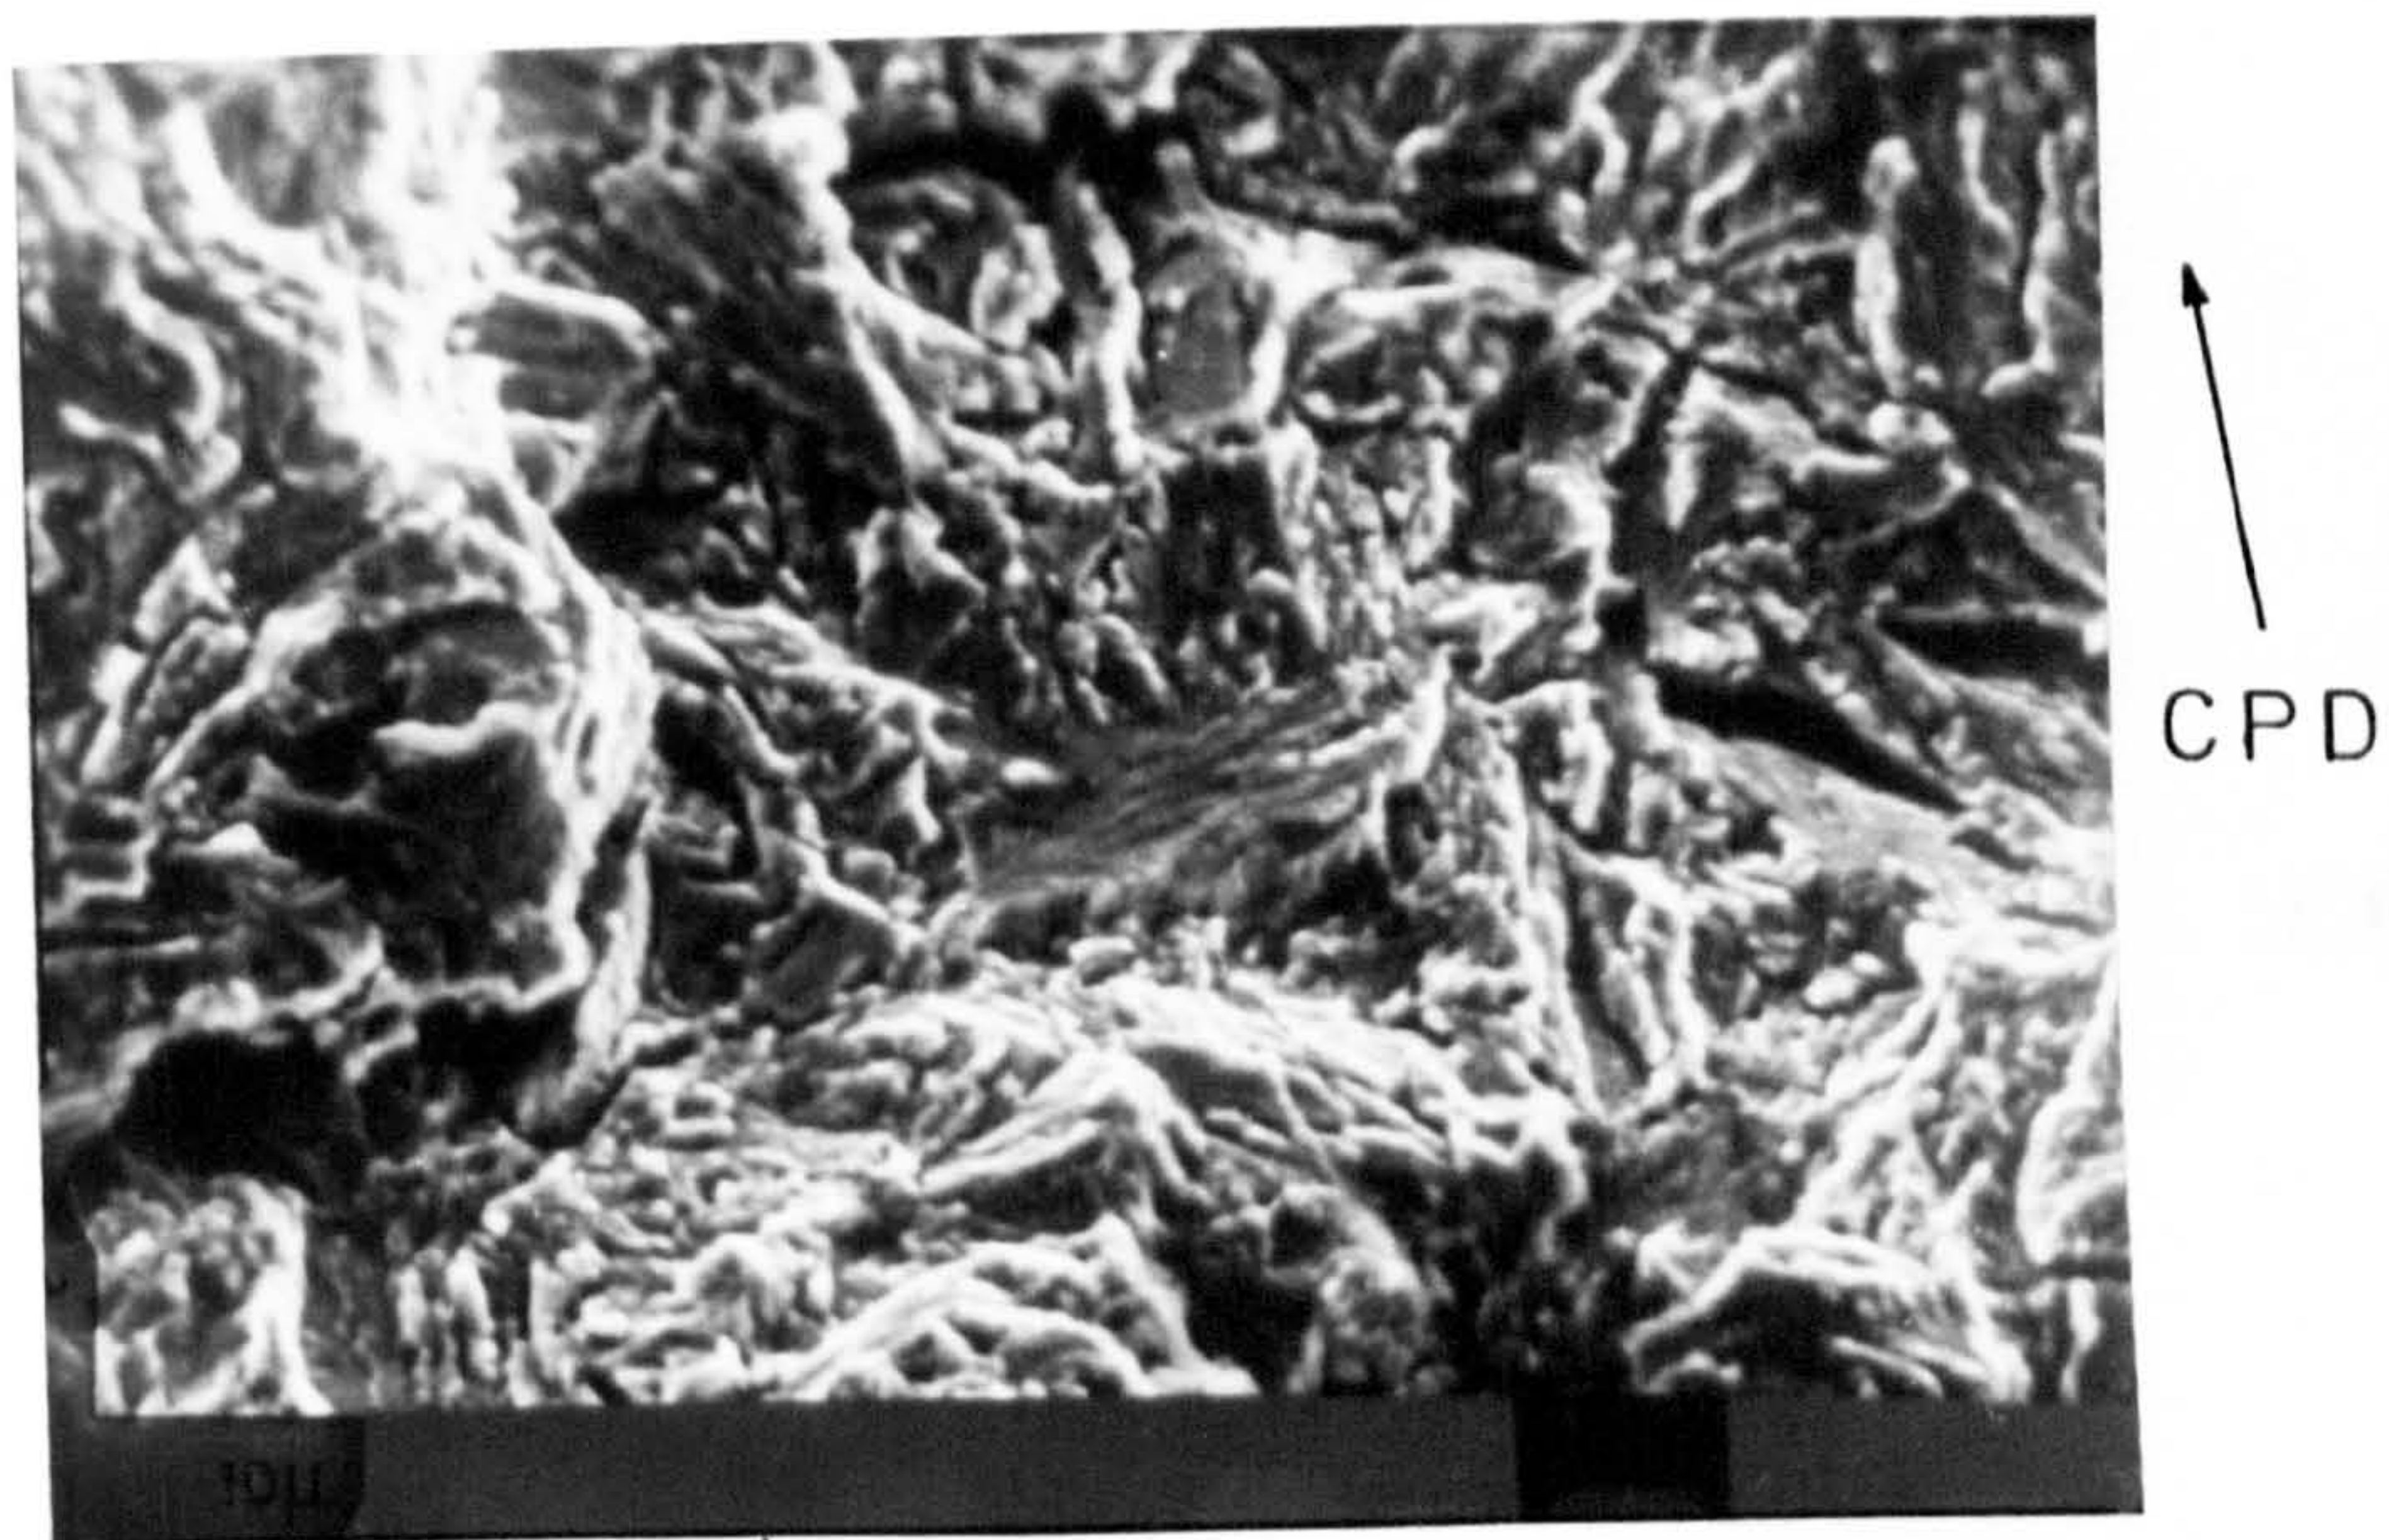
Fracture surface of parent plate specimen, -1400 mV (S.C.E), crack side covered ($\Delta K = 30 \text{ MPa}\sqrt{\text{m}}$)
